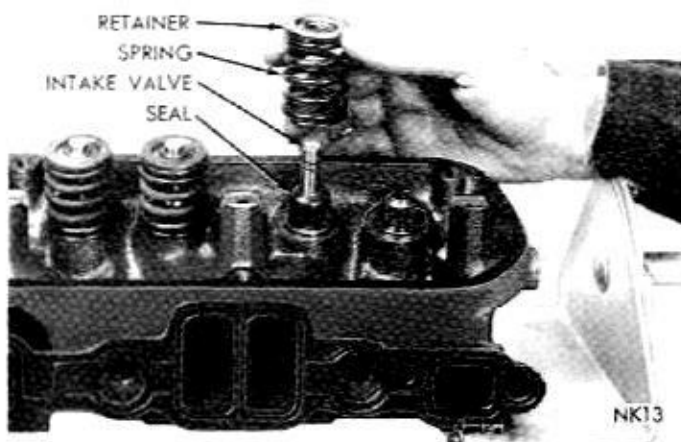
Installing Valve, Cup Seals, Spring and Retainer
